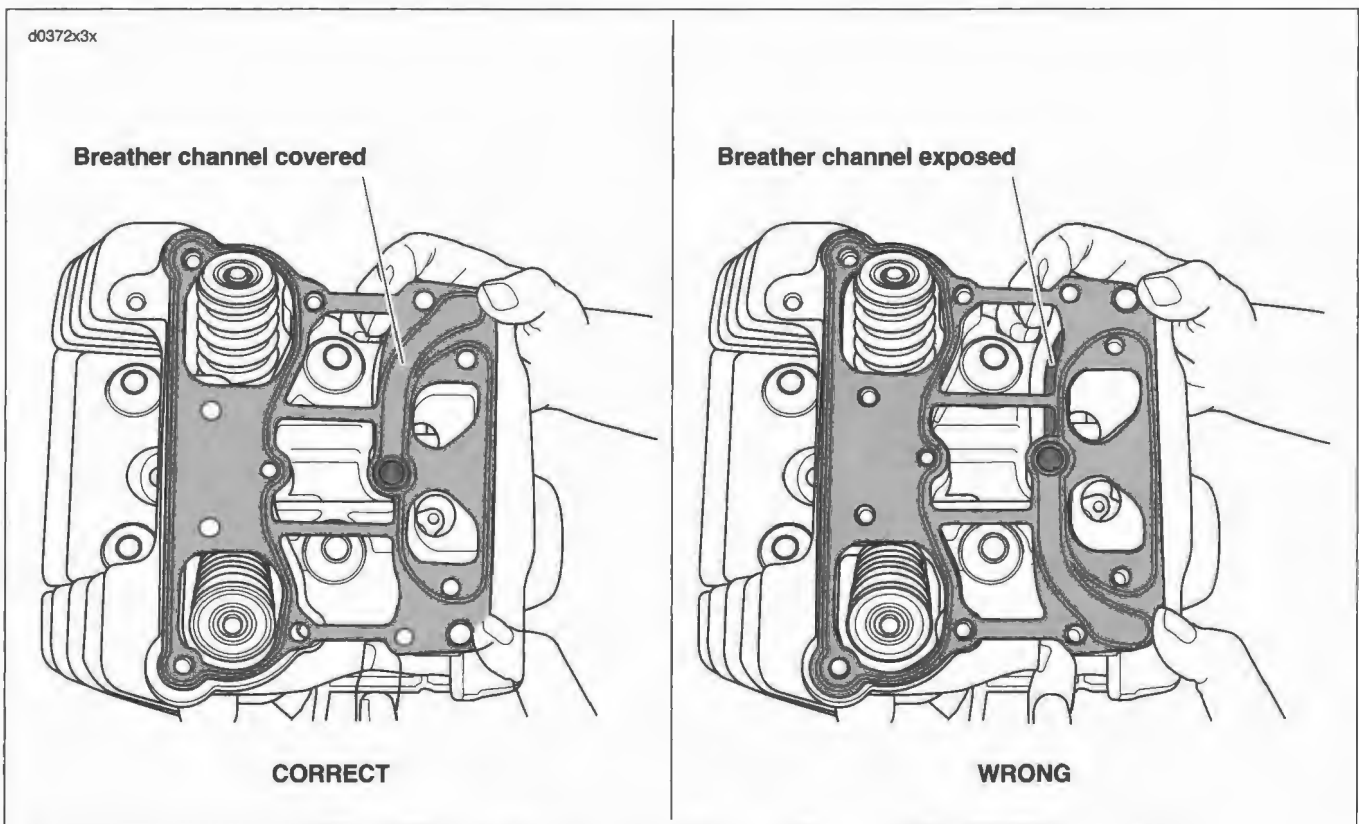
Install Rocker Housing Gasket (Rear Cylinder Shown)
